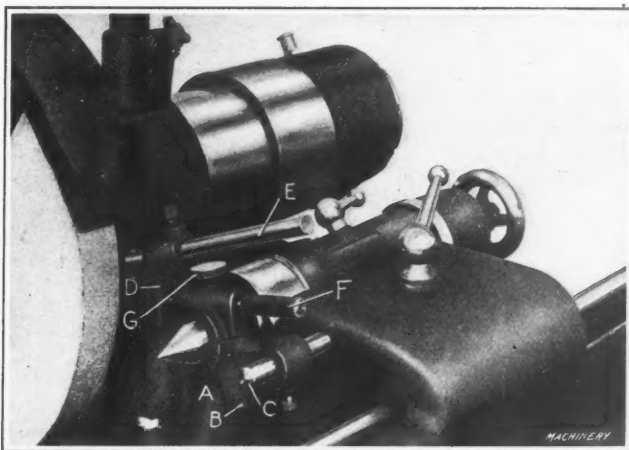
Radius Wheel Truing Device for Use on Norton Plain Grinding Machines
